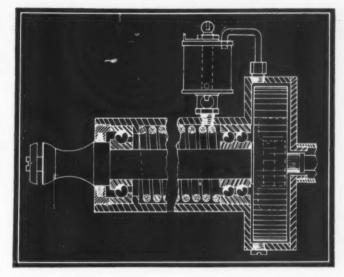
High-speed grinding quill embodying unique method of lubrication
